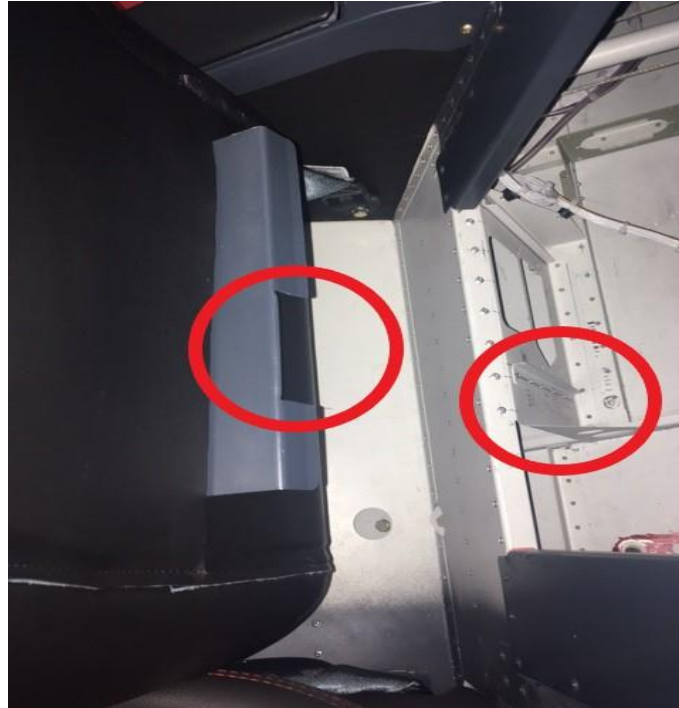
Autopilot console and necessary cut out in seat lower locker (attachment)
